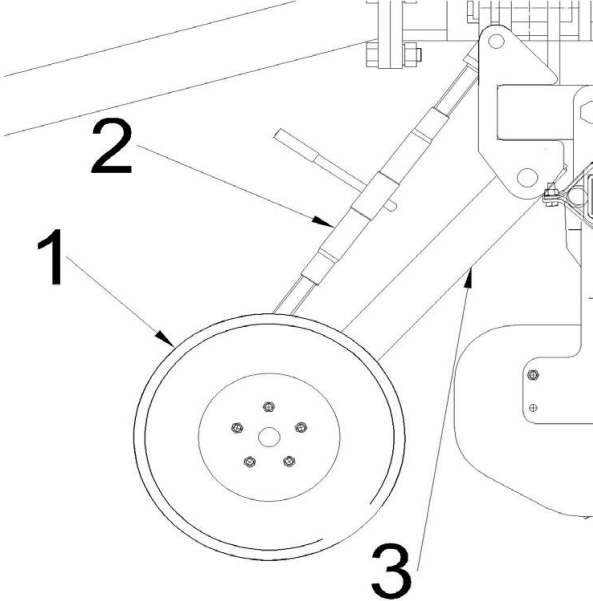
Adjustment of the working depth of the front pieces in TAL-K: 1 – support wheel, 2 – turnbuckle for adjusting the wheel depth, 3 – support wheel arm.
